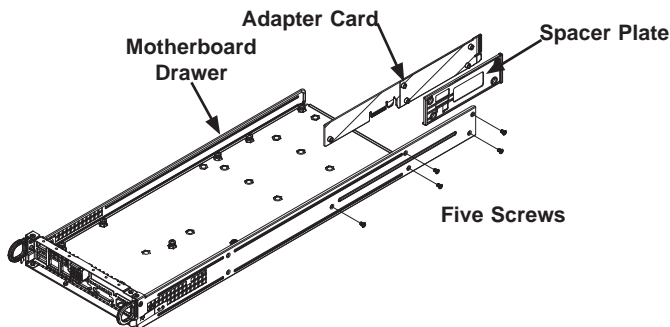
Installing the Motherboard in the Motherboard Node Drawer
